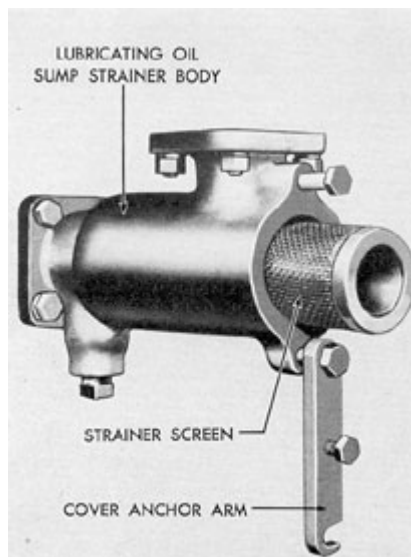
Lubricating oil suction strainer, GM 8-268.
